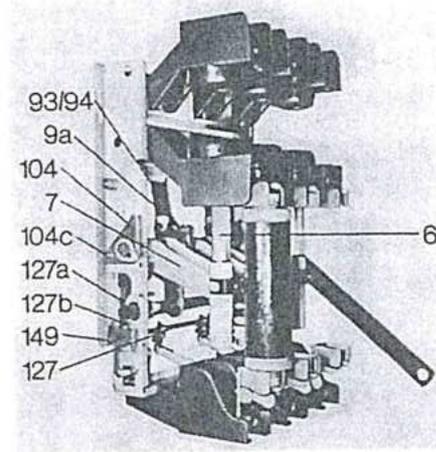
A: Switch manually tripped (switch shaft in OFF-position), closing springs charged and latched.
